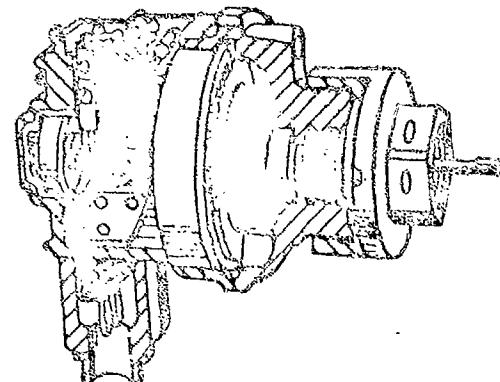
D-C type tachometer generator for speed measurement, with mechanical coupling.
